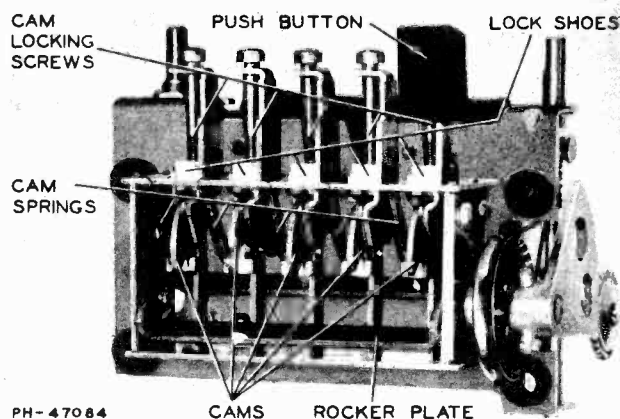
BOTTOM VIEW OF PUSH BUTTON MECHANISM
